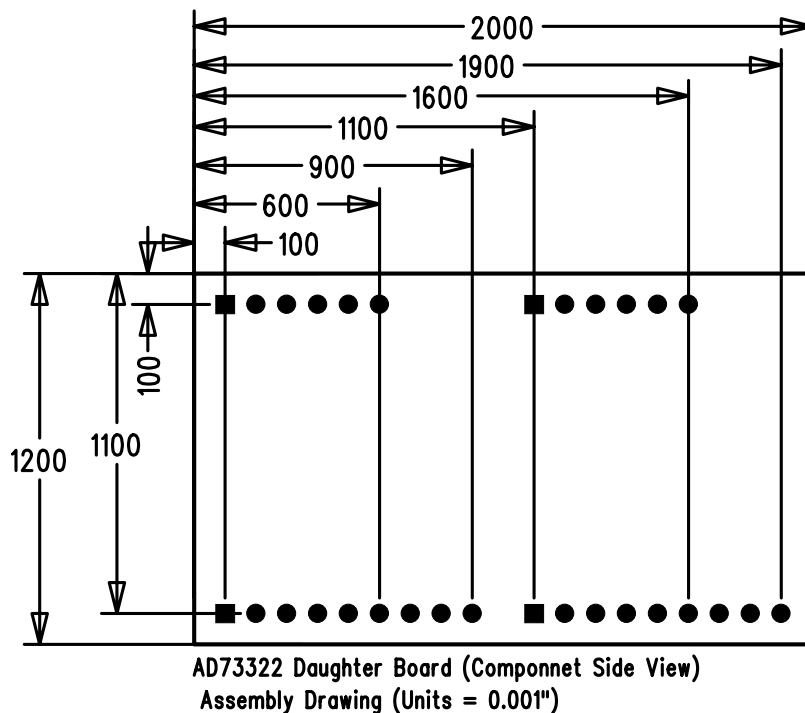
EVAL-AD73322EB Daughter Board Dimensions (Not to Scale)
